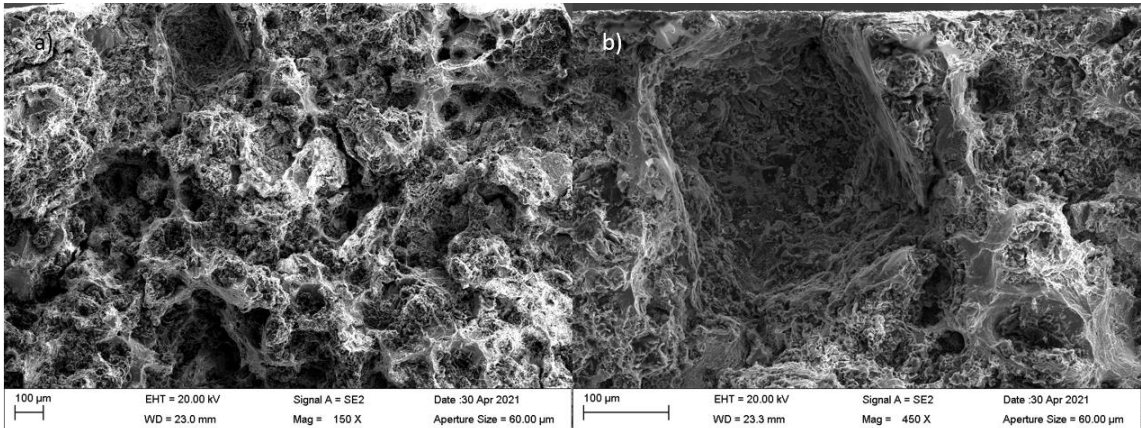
shows the fracture surface more closely from the left side of the surface shown in Figure 69. Figure 70 clearly confirms that the fracture mechanism is fully ductile as there is clear cavities around the graphite nodules and dimple pattern in the ferritic matrix.
